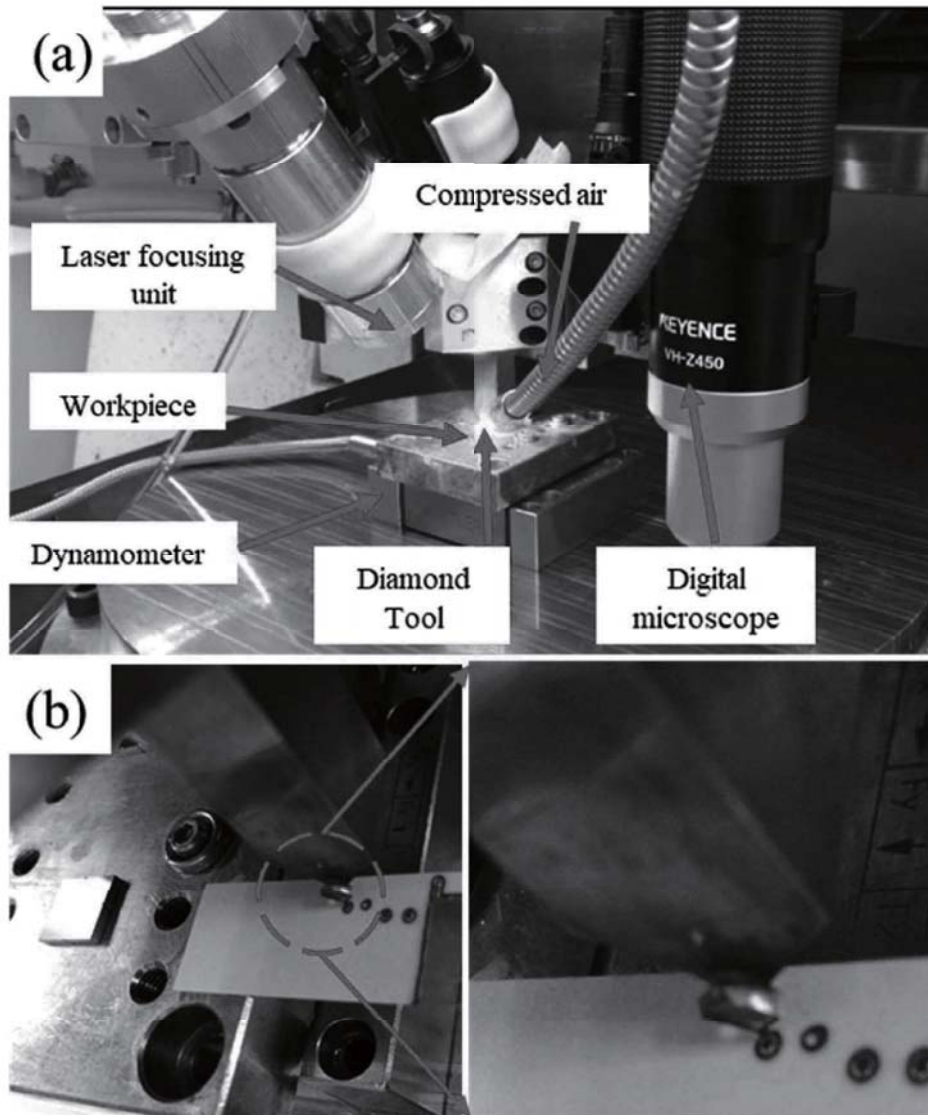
(a) Overview of the laser assisted microcutting equipment and (b) a top view of laser focusing position.
